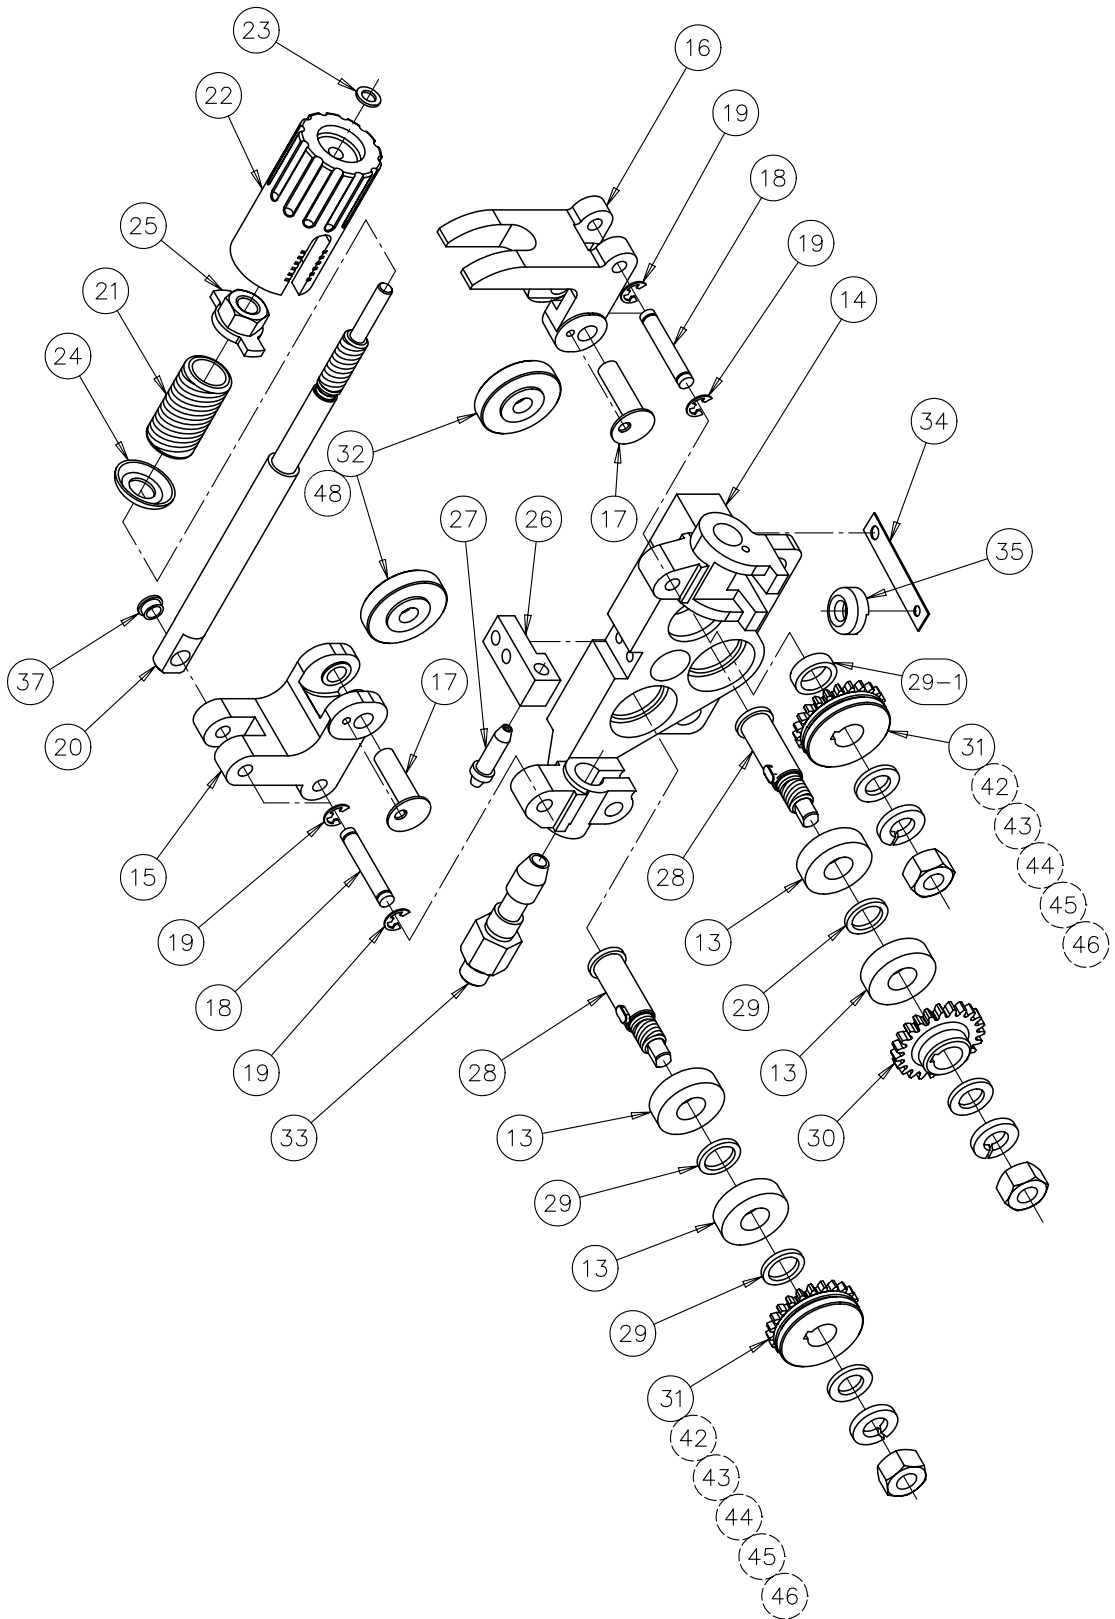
Disassembly Drawing of Wire Feeder and Pressure Parts
